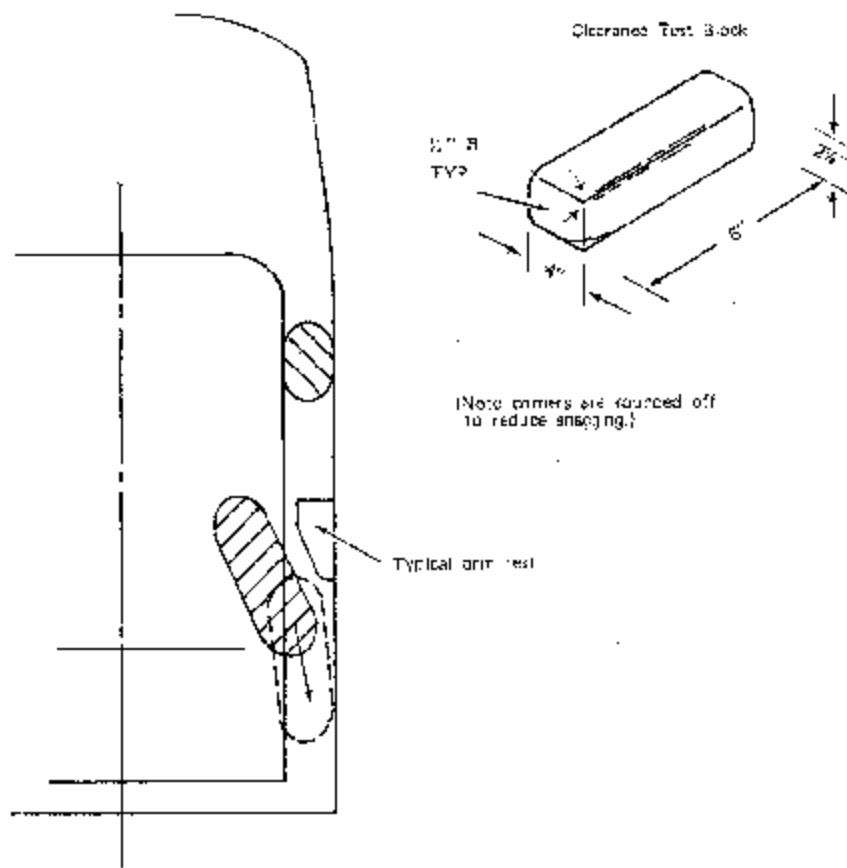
USE OF CLEARANCE TEST BLOCK TO DETERMINE HAND/ARM ACCESS
